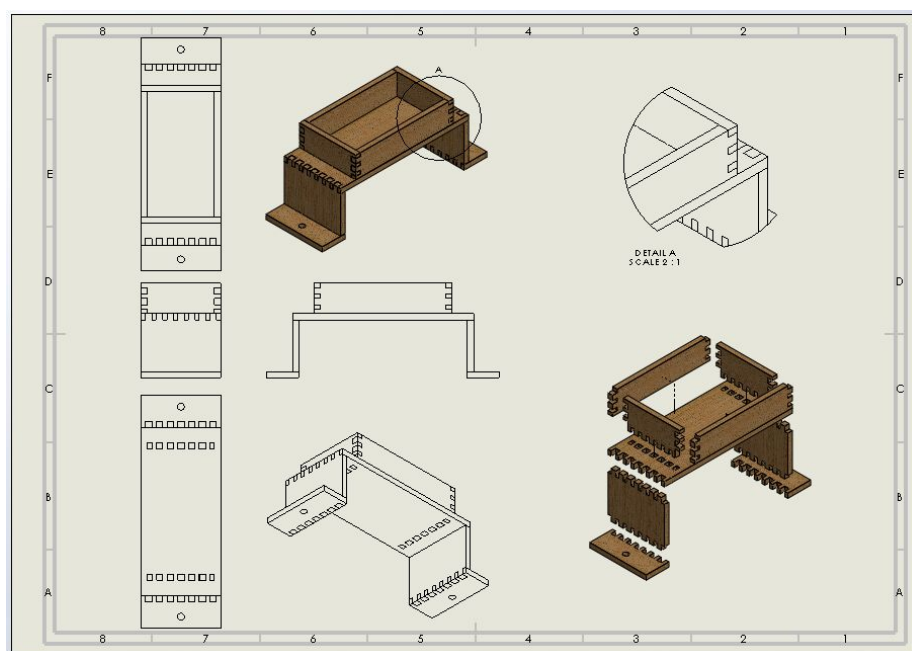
Battery Holder, engineer drawing and exploded diagram
